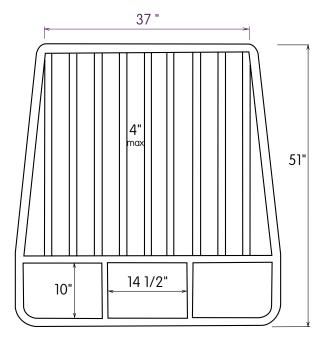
Modified Flounder TED Outside fram 1 1/2" OD AL pipe Horizontal bar 1 1/4" OD AL pipe Vertical bars 1 inch OD AL pipe
